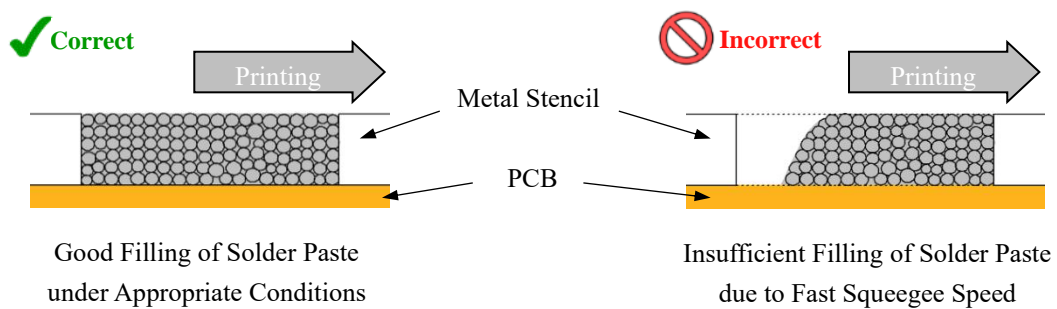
Squeegee Speed and Solder Paste Filling in the Metal Solder Stencil Aperture
